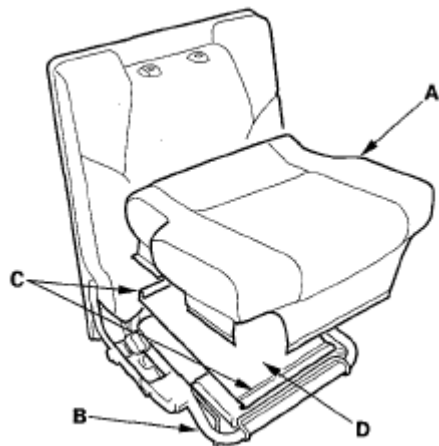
Identifying Cushion Cover, Pad And Seat Cushion Frame
